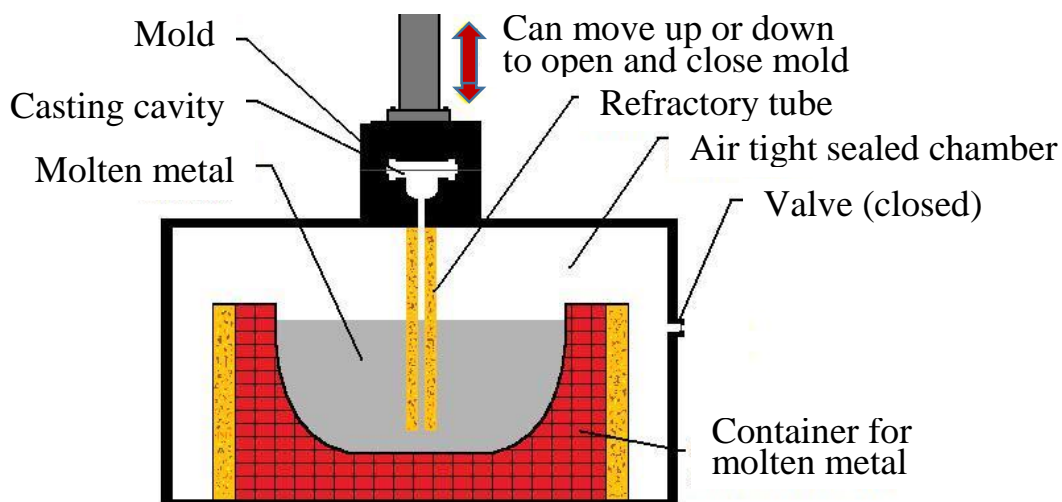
Pressure casting mold is in place and operation is ready to begin
